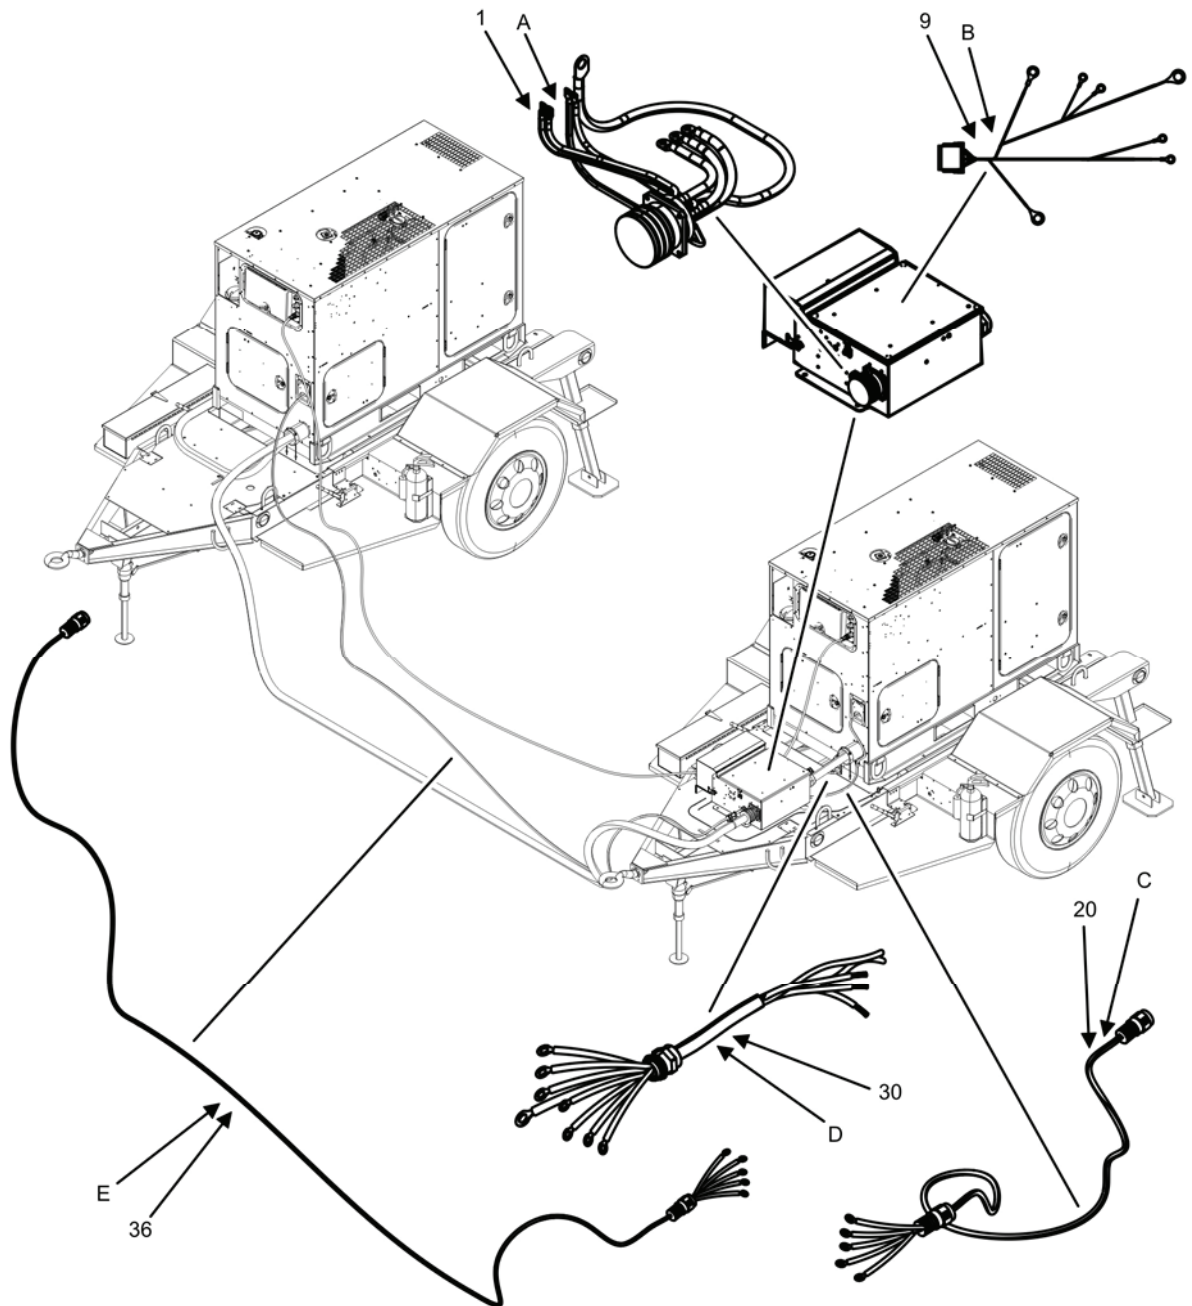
Switch Box Wiring Harnesses (Sheet 1 of 6).
